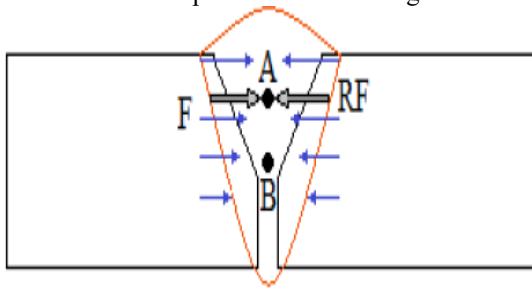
Development of angular distortion in butt welding of a single “V” Groove (5).
